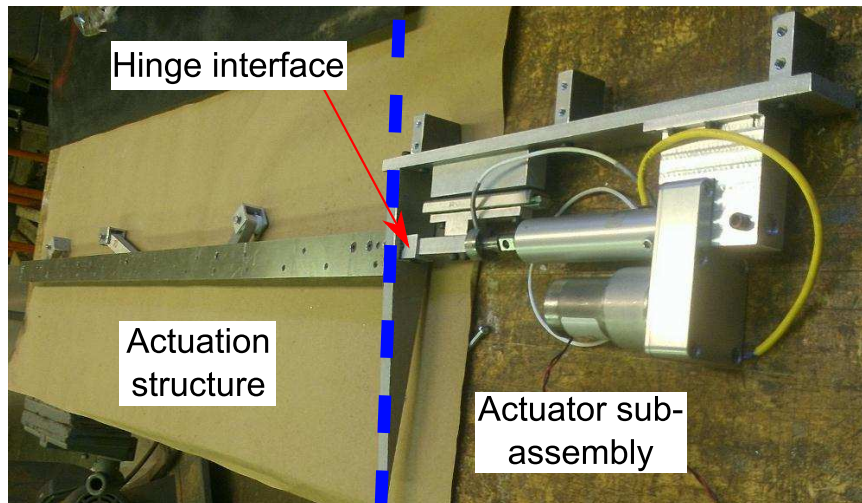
Completed internal structure with the actuator sub-assembly and the actuation structure highlighted
